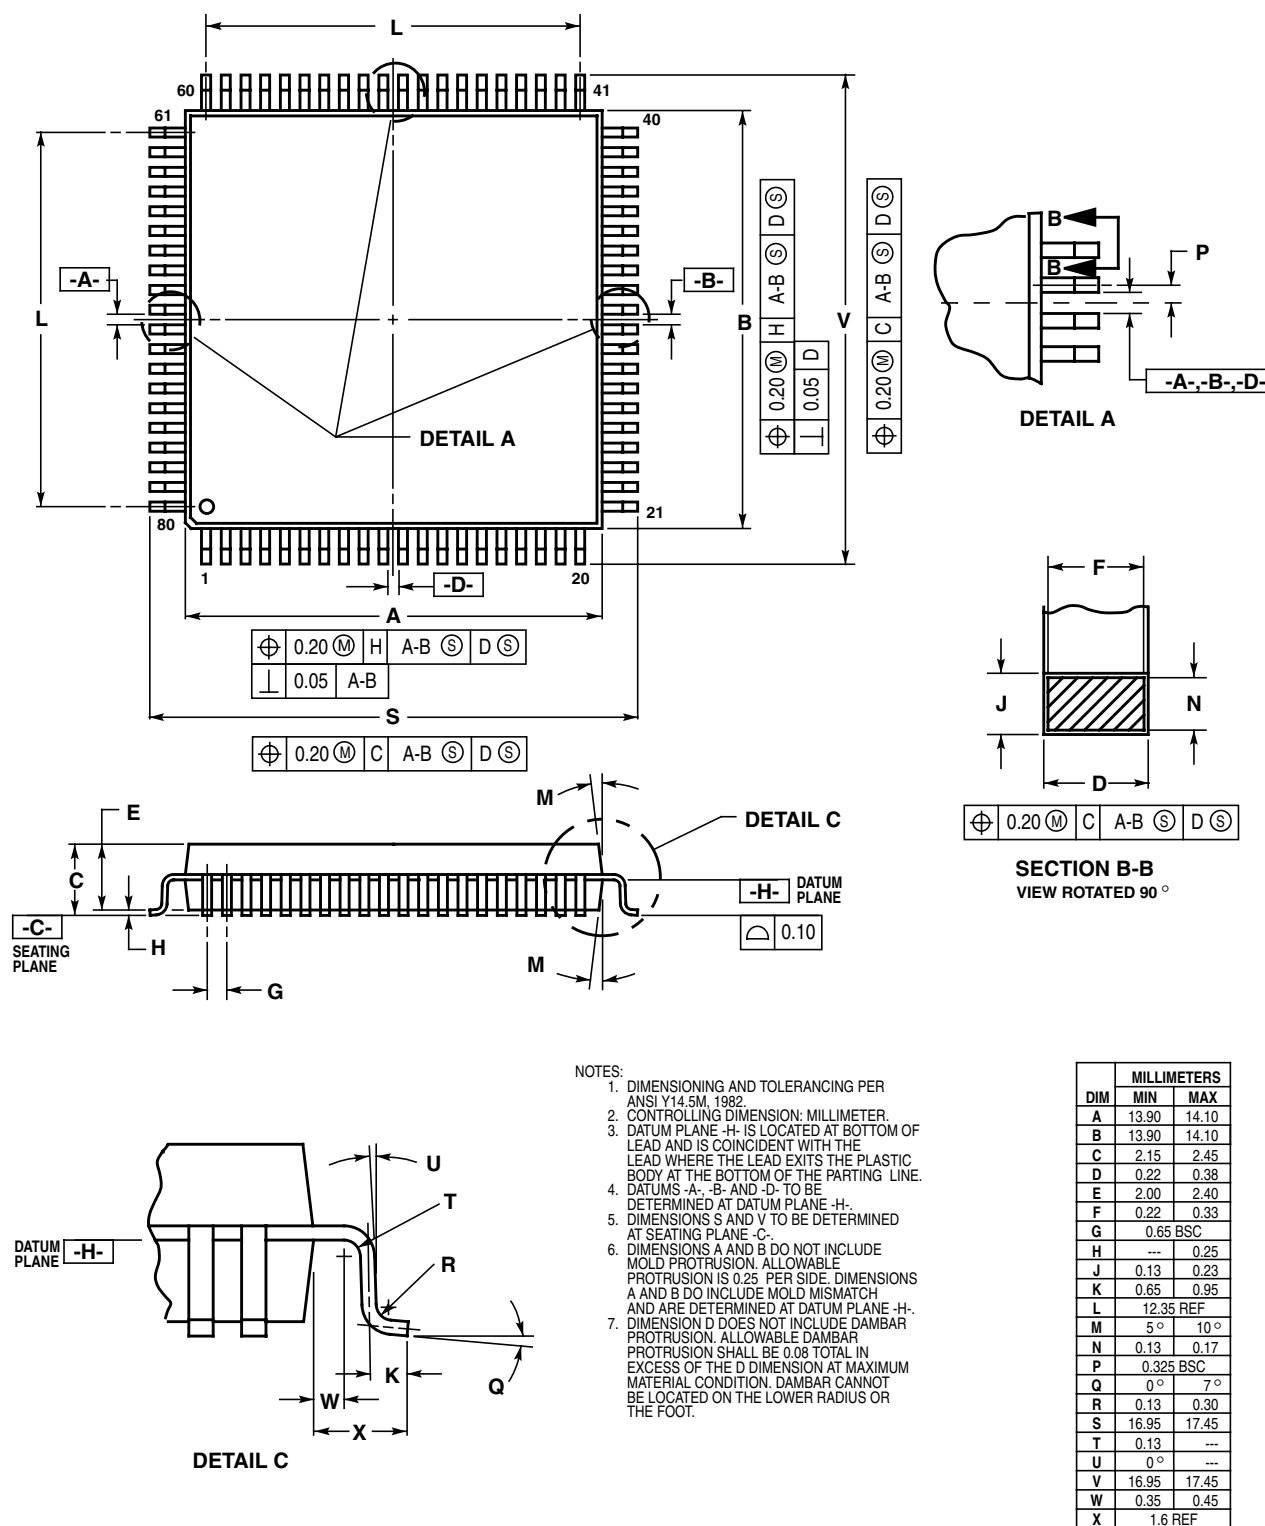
80-pin QFP Mechanical Dimensions (case no. 841B)
